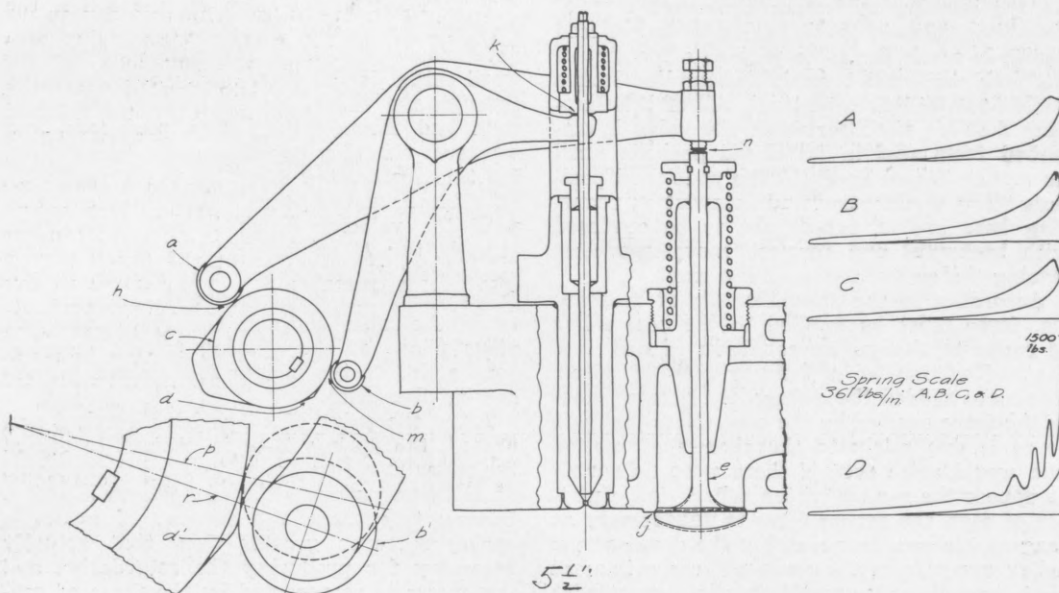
Effect of cam roller clearance on operation of exhaust and fuel valves
